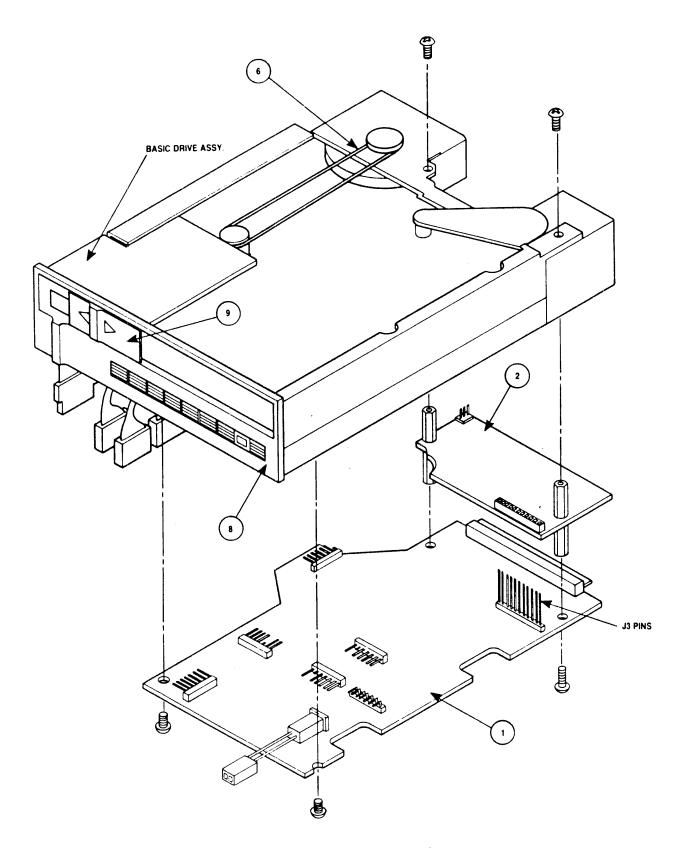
Scorpion Parts Location (Sheet 1 of 2)
